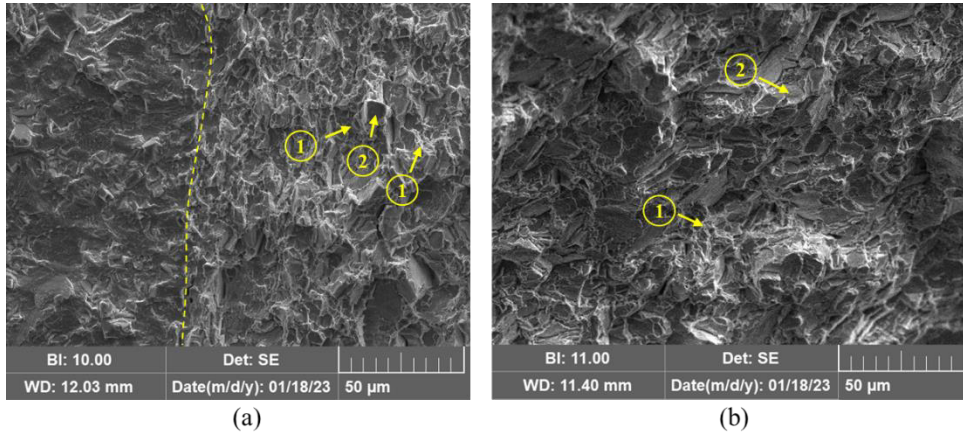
Fractographic analysis with scanning electron microscope (SEM) of the fracture surface of the biaxial specimen C2: (a) Initial crack surface and stable crack extension surface; (b) Final fracture surface.
